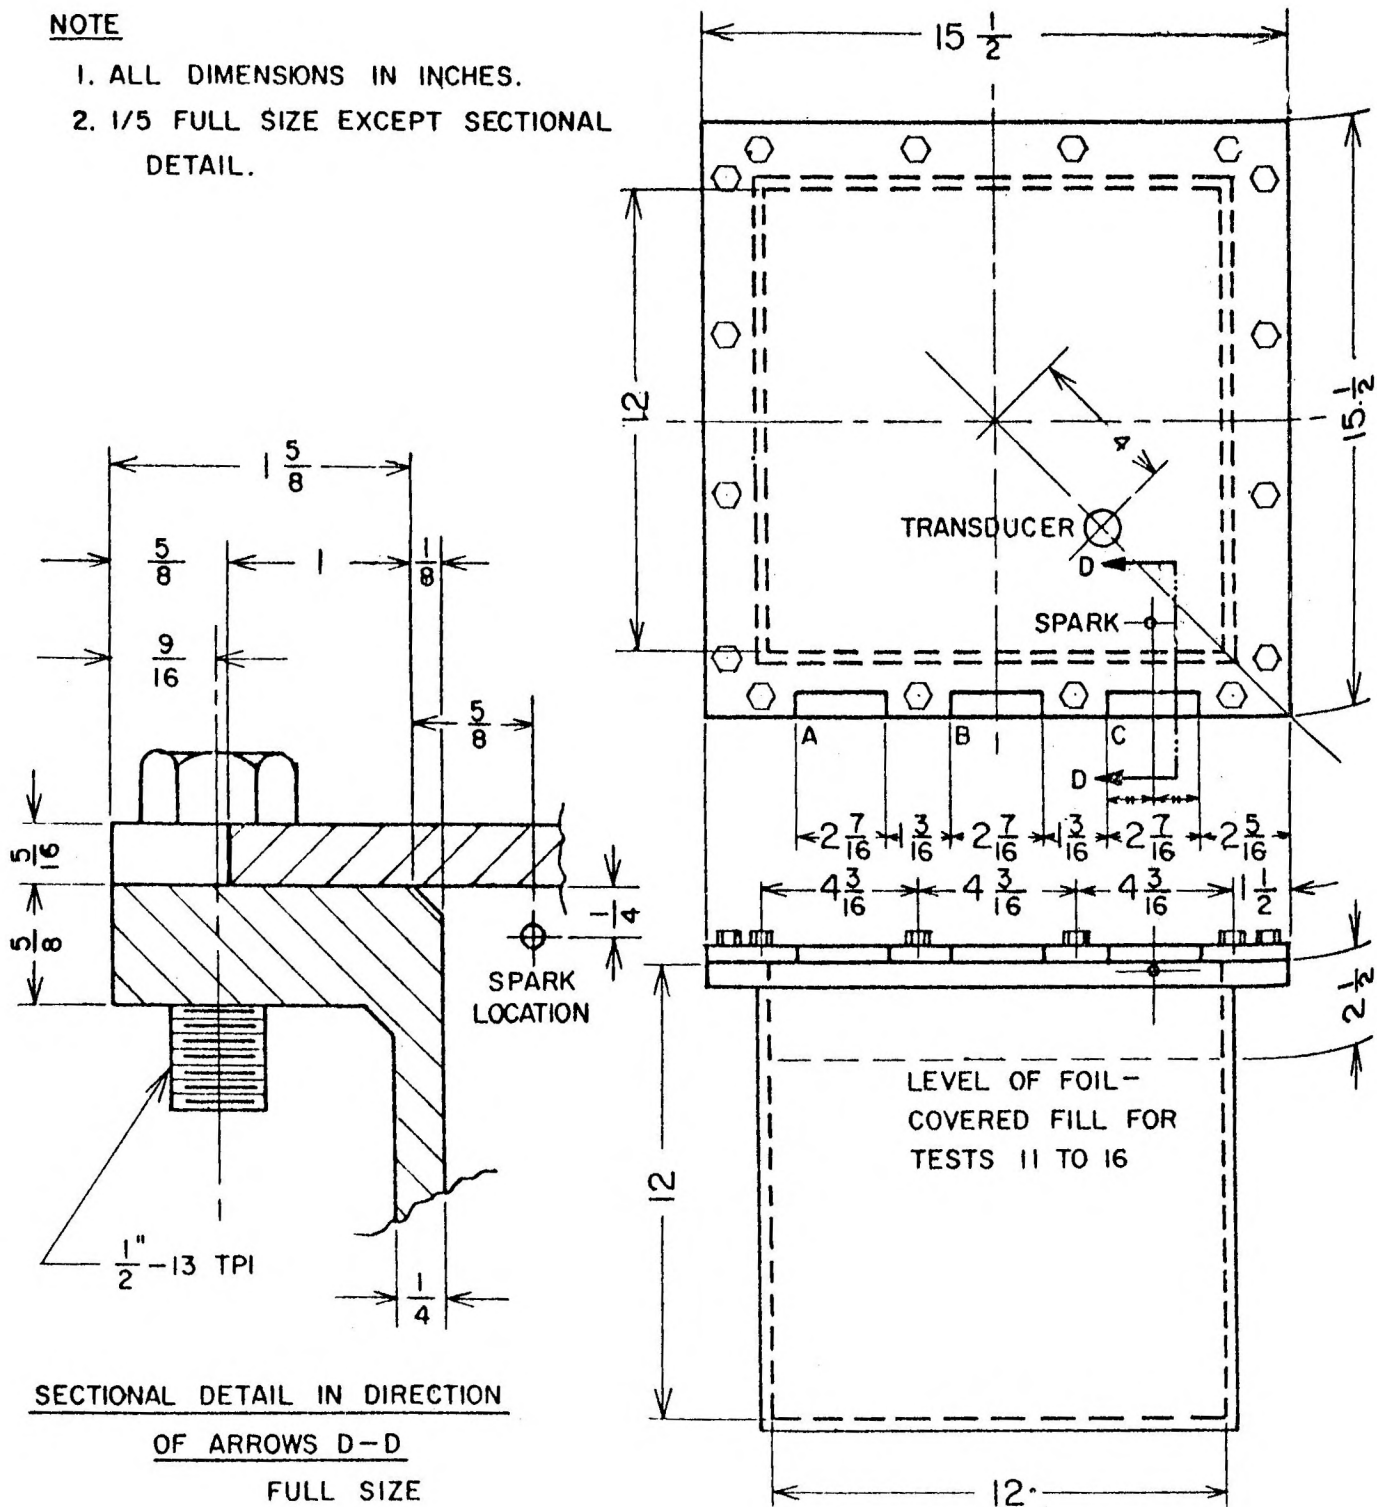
DETAILS OF ONE-CUBIC-FOOT
